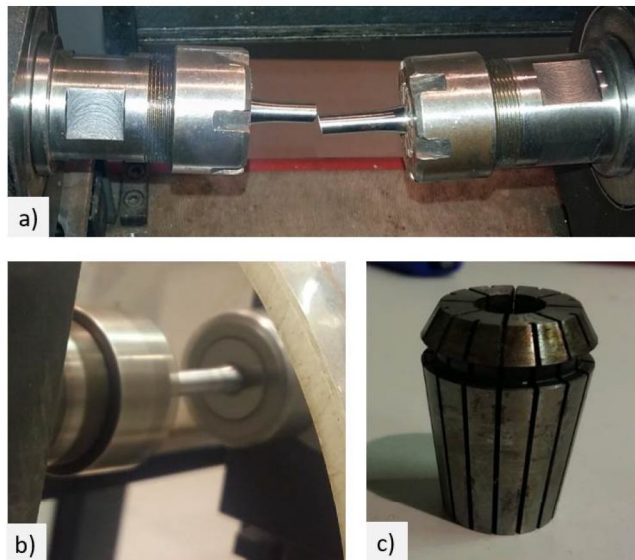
a) Clamped specimen after break, b) Specimen running, c) Chuck collet
